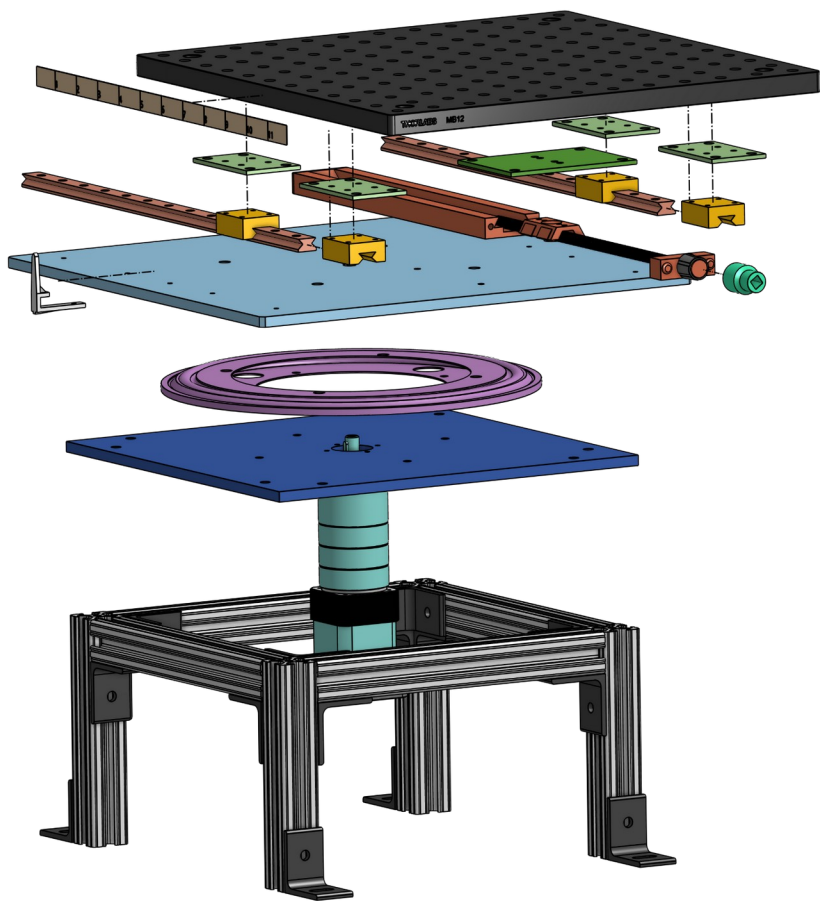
Exploded assembly showing the translation carriage, rotating platform, bearing structure, drive, and frame.
